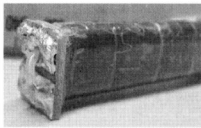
Formers wrapped in tape, I used clear tape just so you could see the formers, but other should work just as well. Also note I had to trim down the end pieces of PCB a bit to fit. The end shown is the end that goes to the resistors so that one centre conductor is bent over to connect to the other side and the other centre conductor is cut off flush.
